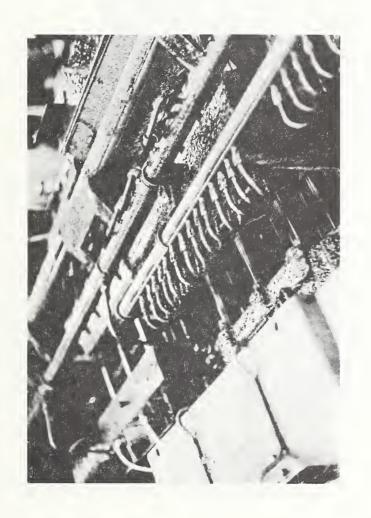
OPERATION 20A - HEAD MACHINING (LAMB TRANSFER MACHINE)
